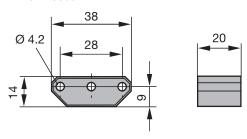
Installation dimensions of BTL5-P-3800-2 magnet
